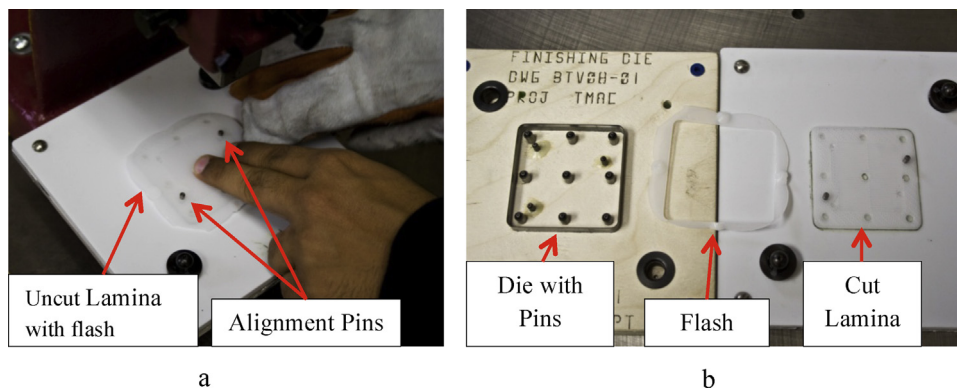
(a) Bottom die cutter fixture with alignment pins and (b) top die cutter fixture with pins for making thru-holes and removing flash; excess flash; and a resultant cut lamina with thru-holes and inlets.
